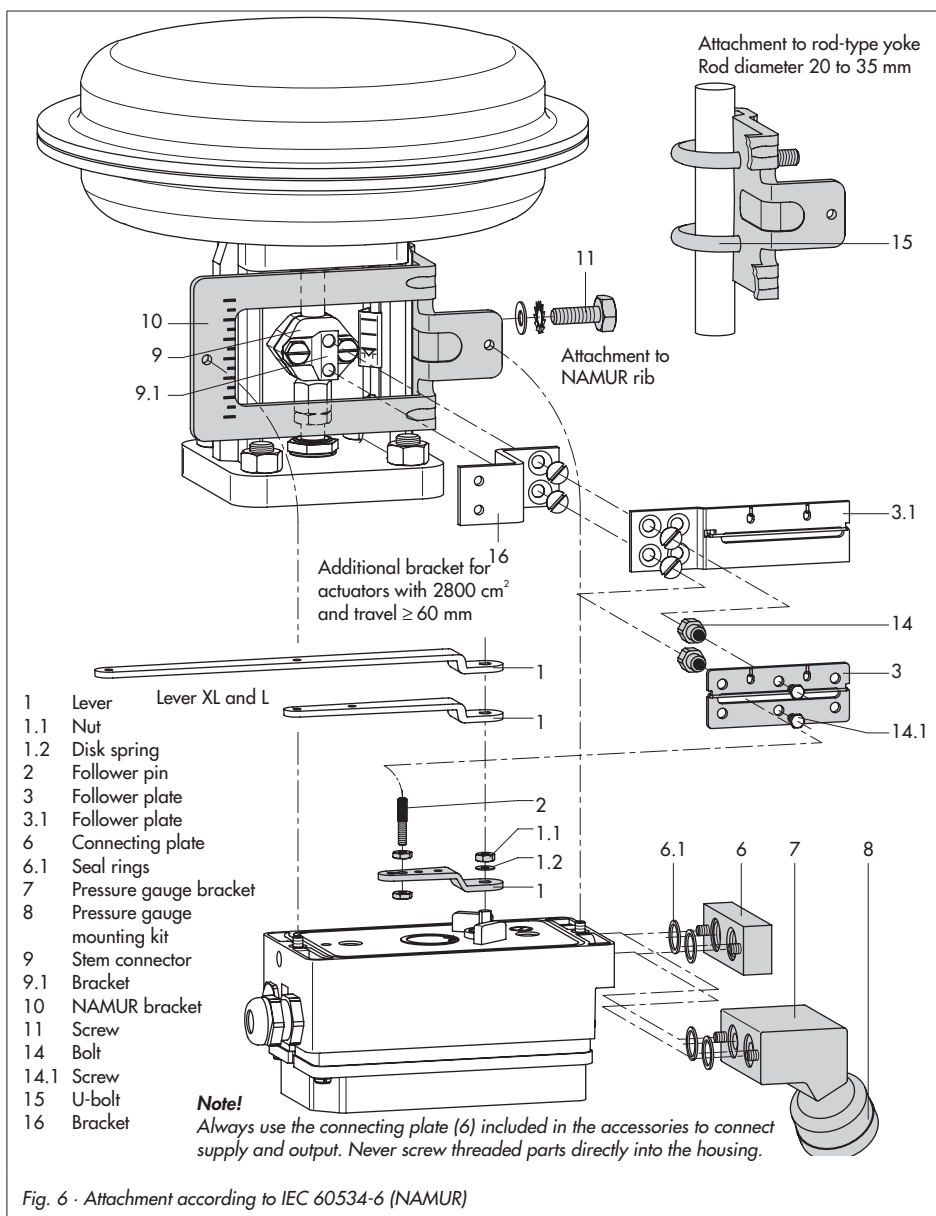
· Attachment according to IEC 60534-6 (NAMUR)
